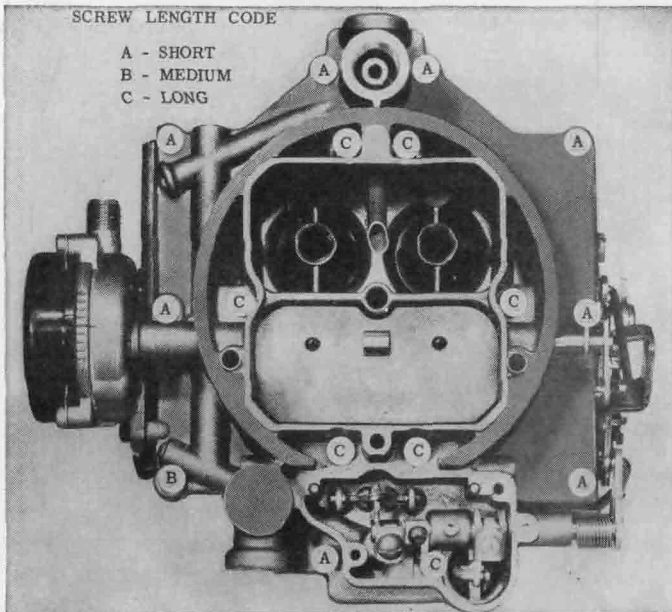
Location of screws attaching the air horn. (Oldsmobile Division of General Motors Corporation)
